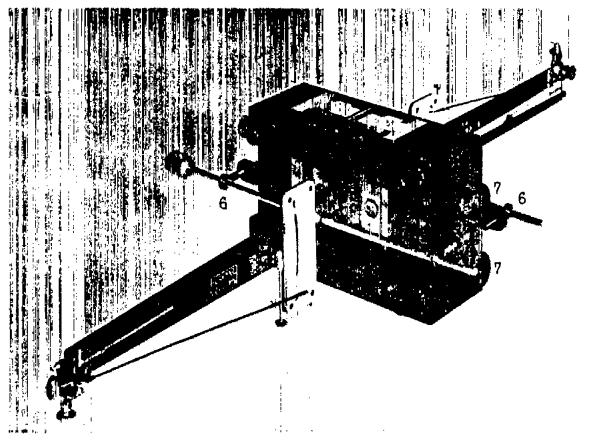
Device for making compression tests of single thicknesses of sheet metals
